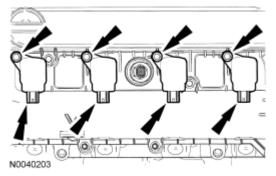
Locating Coil-On-Plug Assemblies And Bolts
